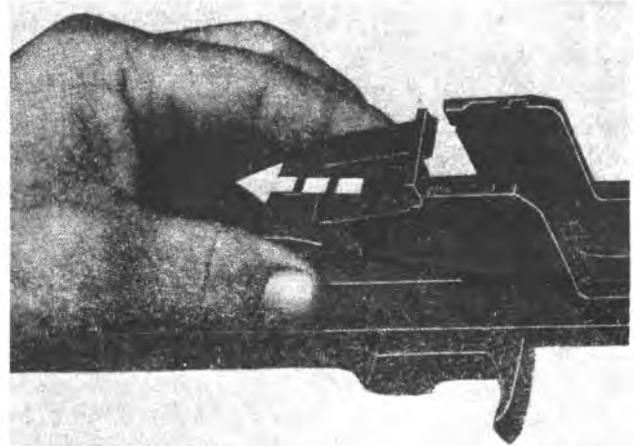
Removing the bullet guide, follower arm, and operating rod catch assembly.
